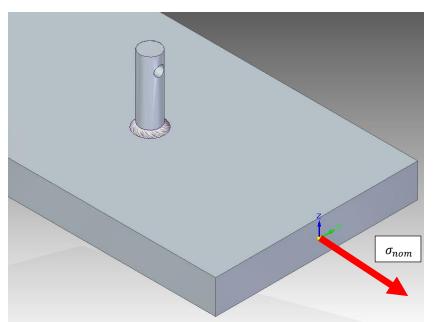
Concept 3: Solid bar of diameter 30 mm joined by 5 mm fillet weld to the plate
